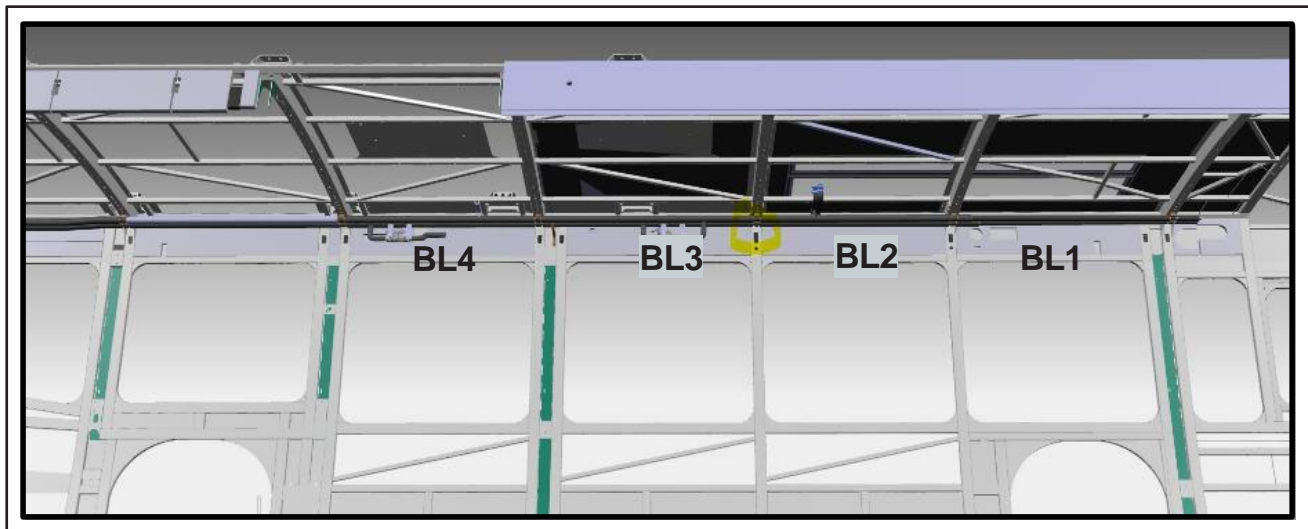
Baselight Panel location to check Coolant Pipe Solder Joints
